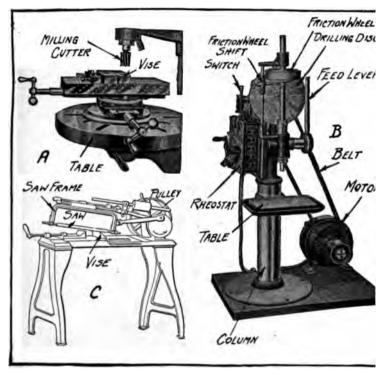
Practical Machine Tools for Small Machine Shop.
